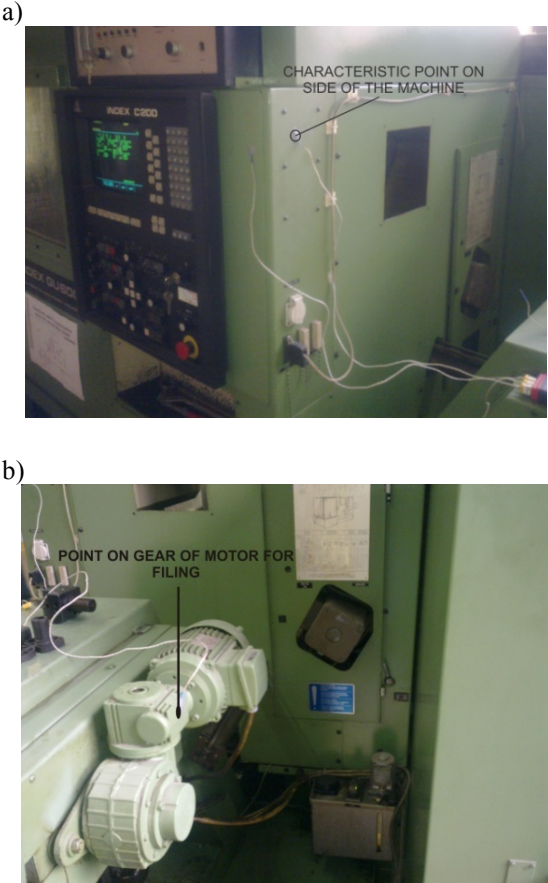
Side of the machine (a) and motor gear for chip transporter (b)
